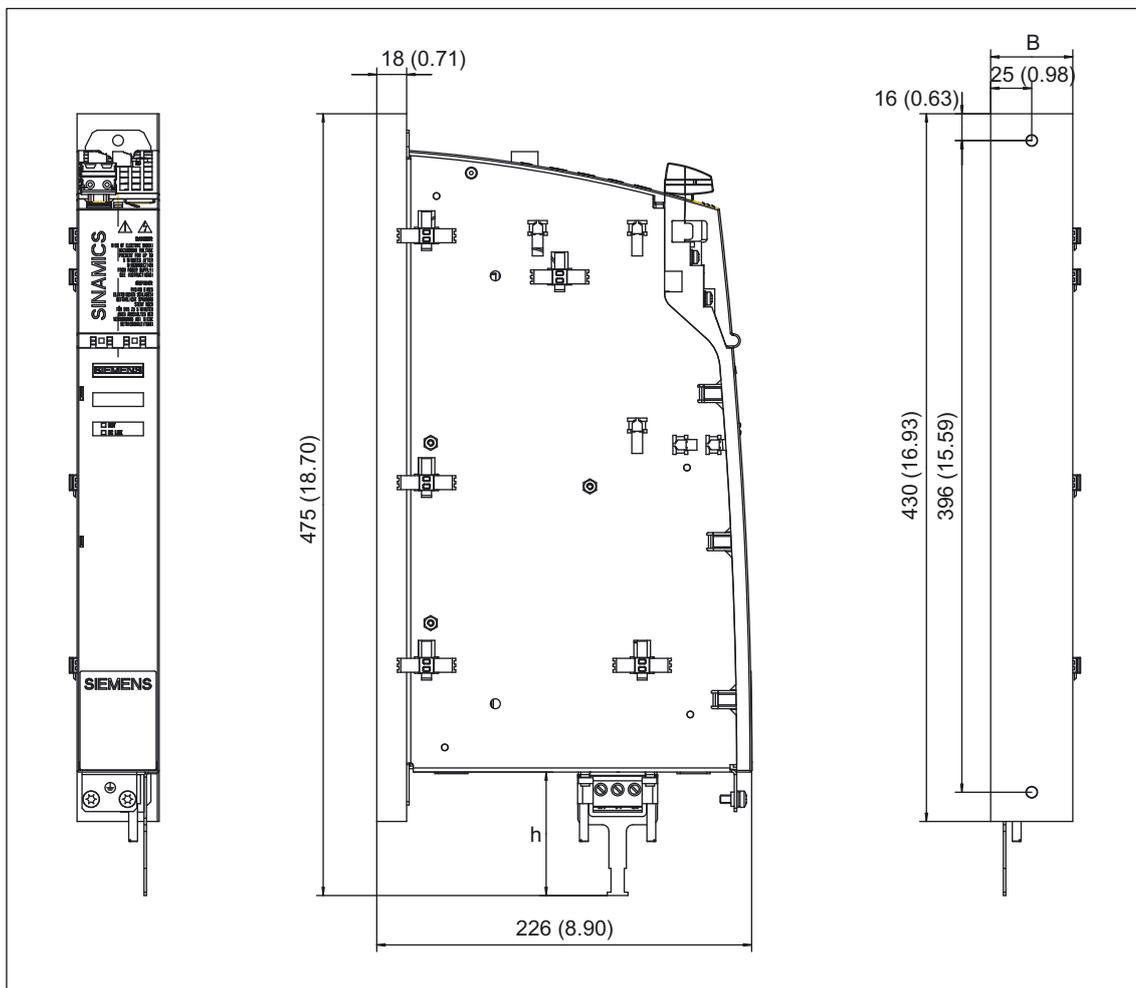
Dimension drawing, Smart Line Module with cold plate (5 kW and 10 kW)
